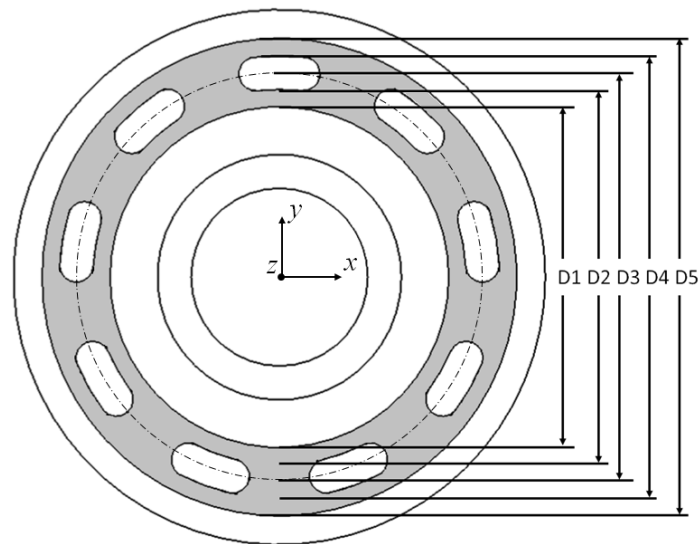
Cylinder block's bottom view and sealing land design parameters.
